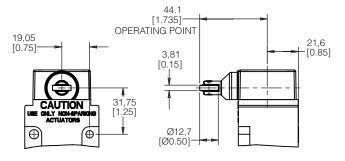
MICRO SWITCH BX Series Adjustable Side Pin Plunger, Head Code W • mm [in]
